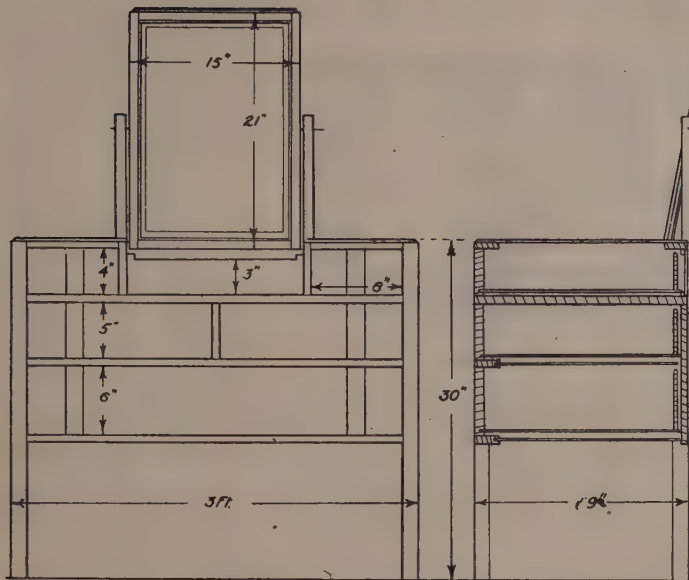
ELEVATION AND END SECTION WITH PRINCIPAL SIZES.
